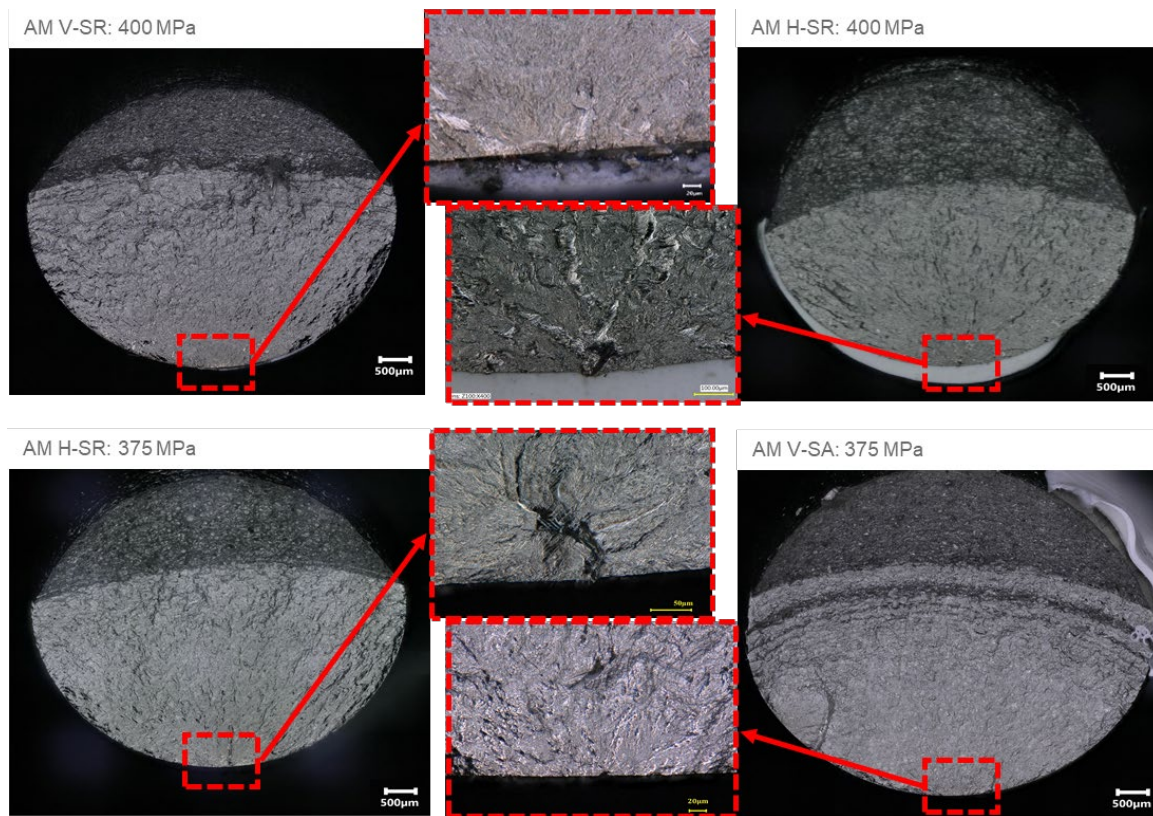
Fracture surfaces from several force controlled fatigue tests for each AM condition.
